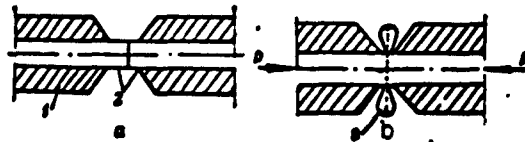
Diagram of press welding. a) Initial welding period; b) final welding period. 1) Gripping device; 2) components to be welded; 3) flash.
